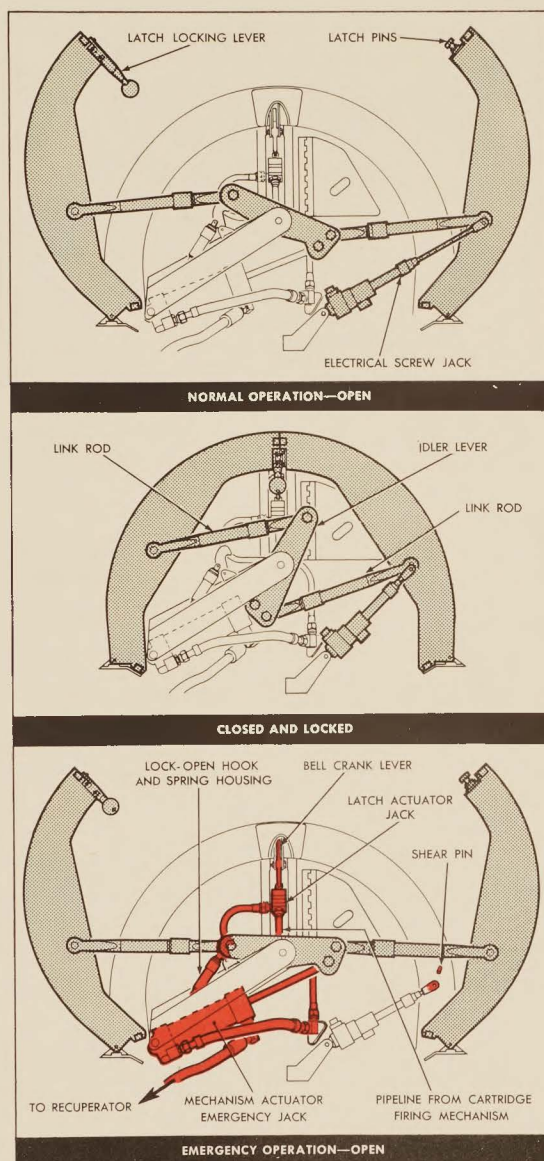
CANOPY ACTUATING MECHANISM - GEOMETRY
